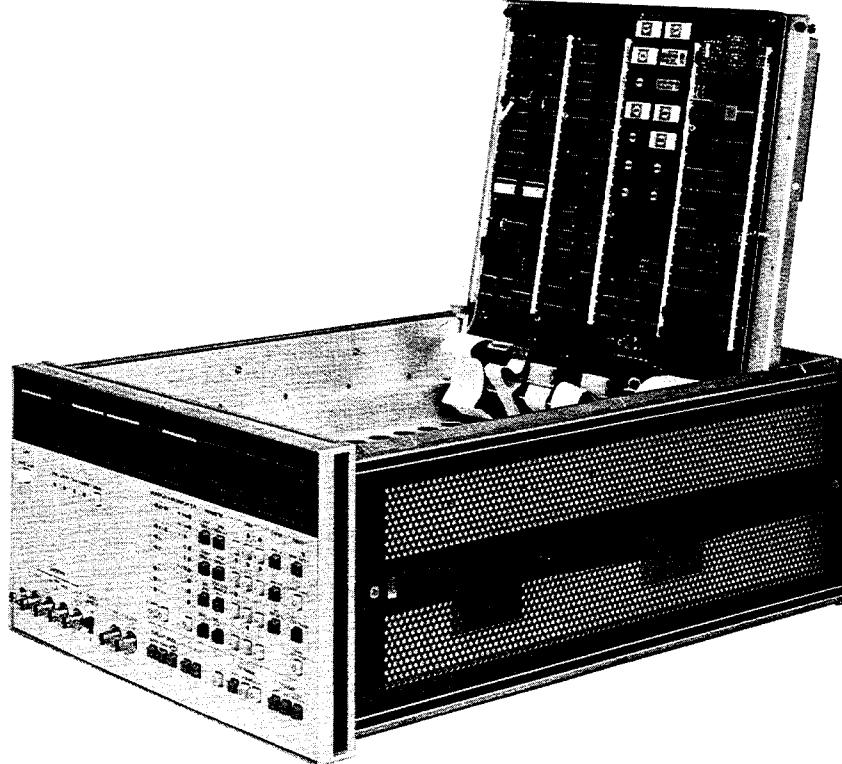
A6 Microprocessor Digital Control Board Disassembly.
